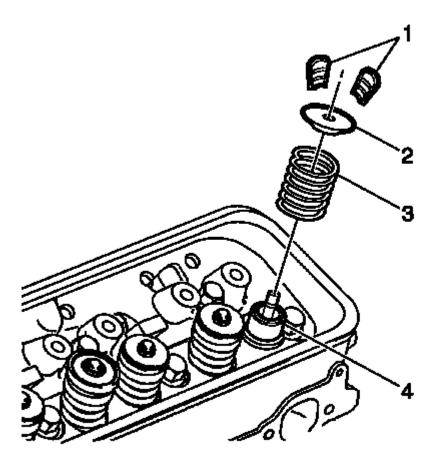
Identifying Valve Components Courtesy of GENERAL MOTORS CORP.
